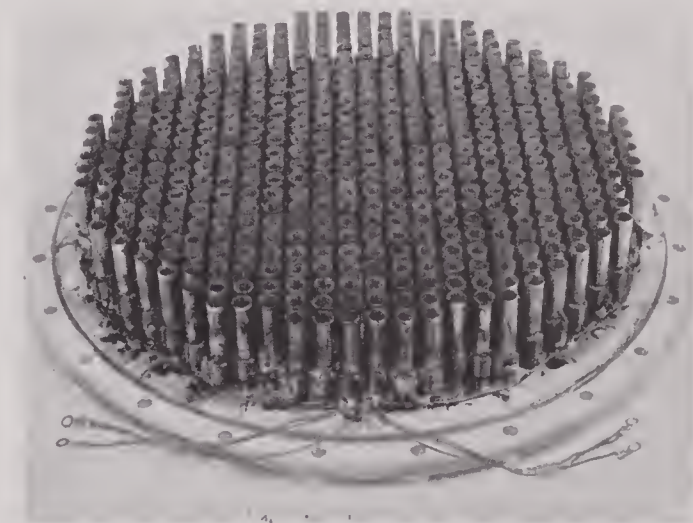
Tube-and-plate assembly for XI-100 experimental QC projector (BTL).
